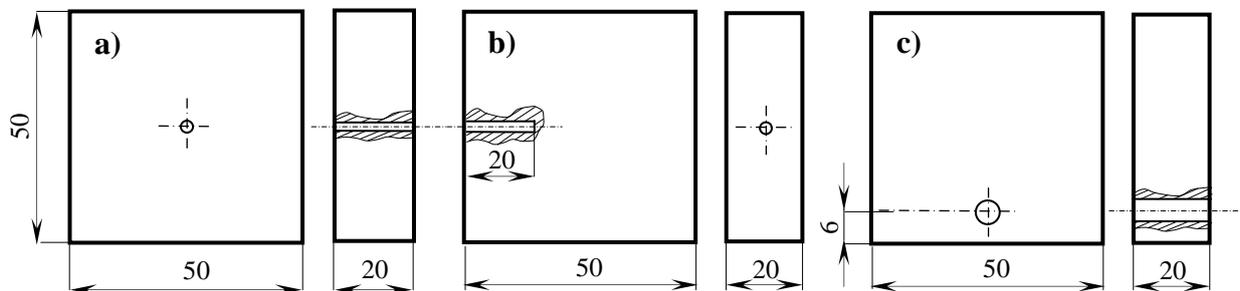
Shape and dimensions of samples with drilled pilot holes: a) withdrawal resistance of a screw perpendicularly, b) withdrawal resistance of a screw parallel and c) screw lateral resistance
